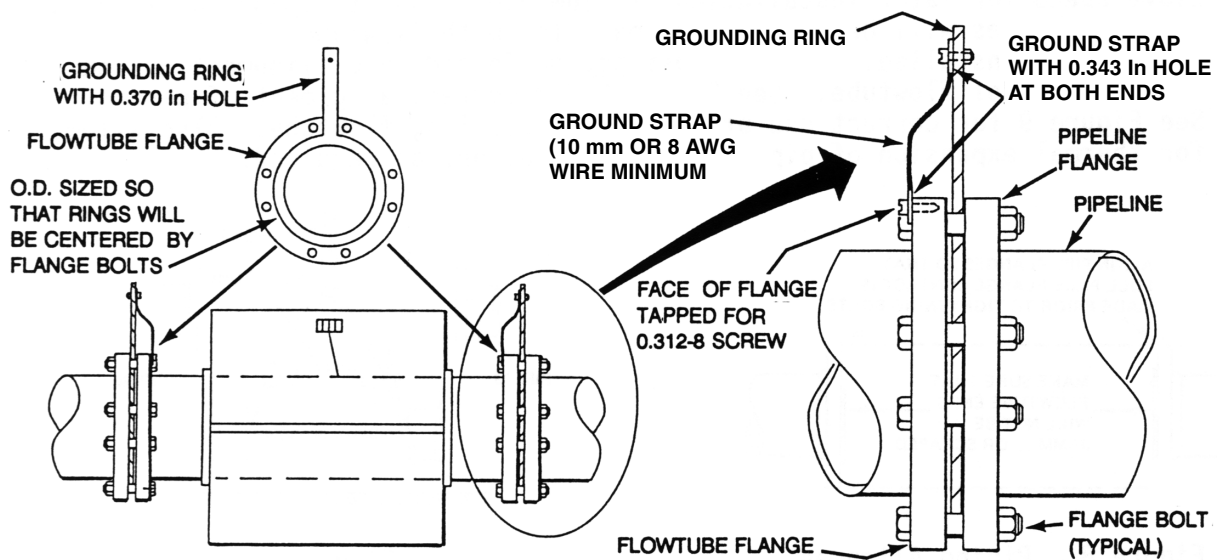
Use of Grounding Rings with Flanged End Flowtubes
